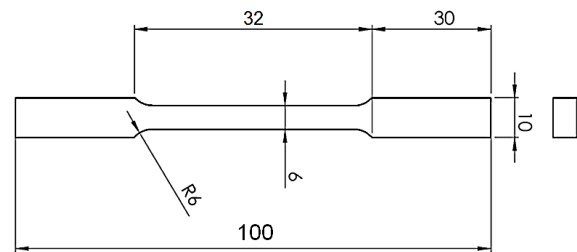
shows the geometry and measurements of the specimen tensile-test.
